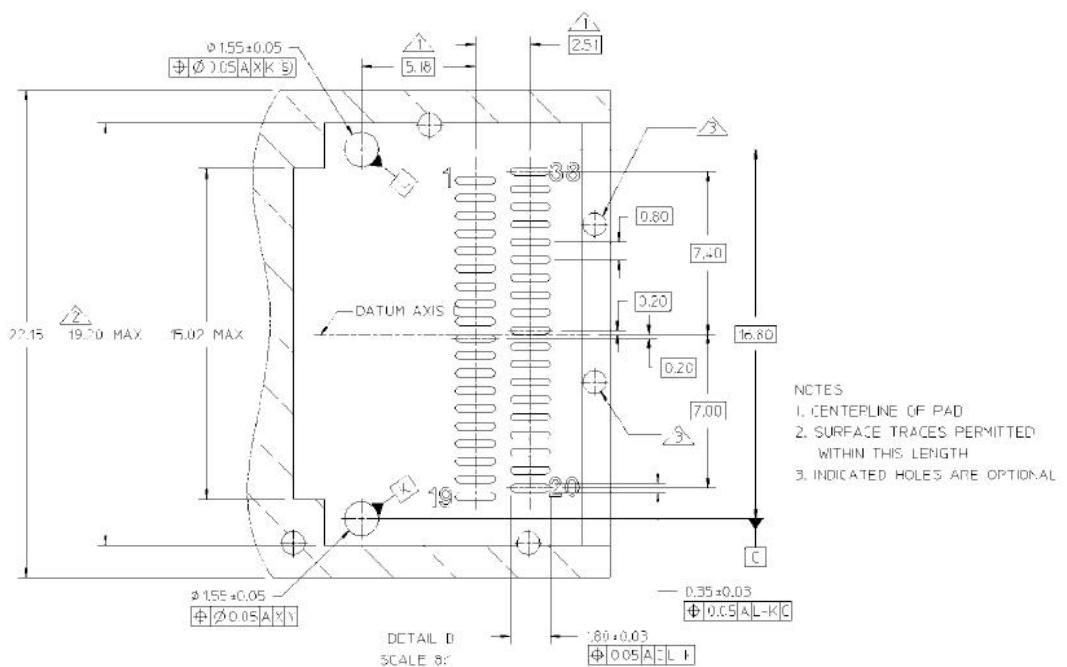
QSFP+ Host PCB Mechanical Layout, Detail Z
